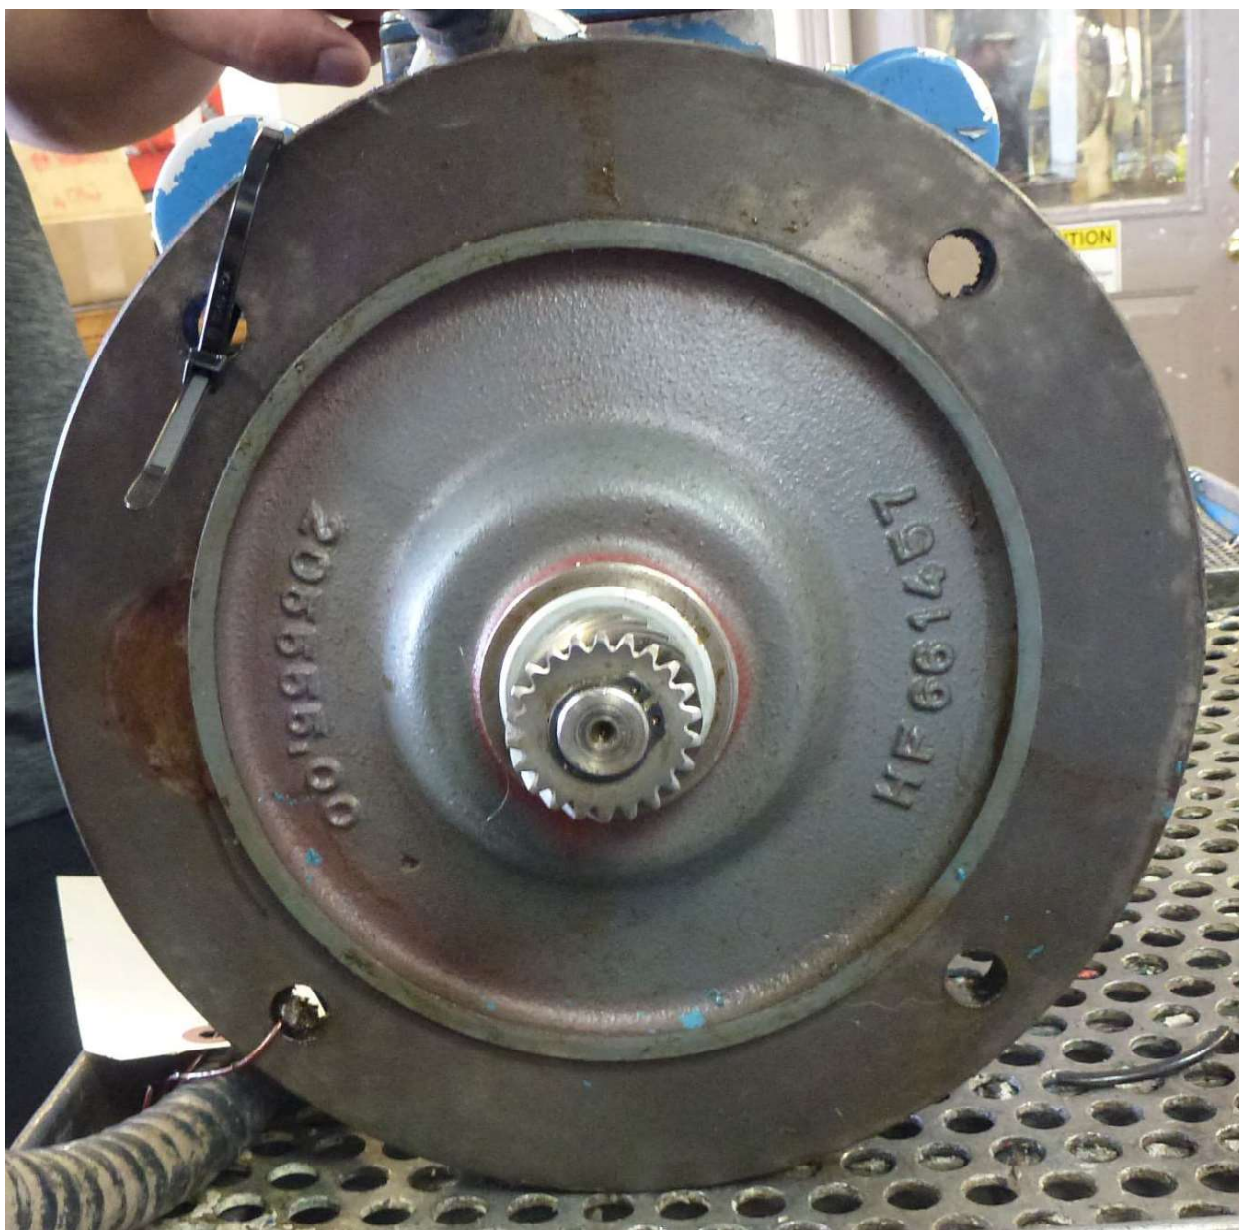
Motor #1's faceplate with gear that drives worm gearbox.
